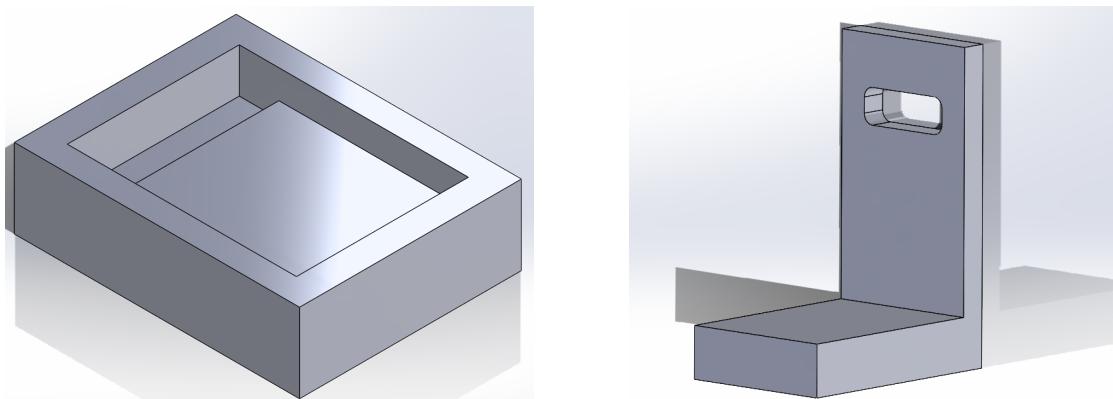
a) Cross section of roof for testing how the microphone fits b) Cross section of wall for testing how the USB-C port fits
